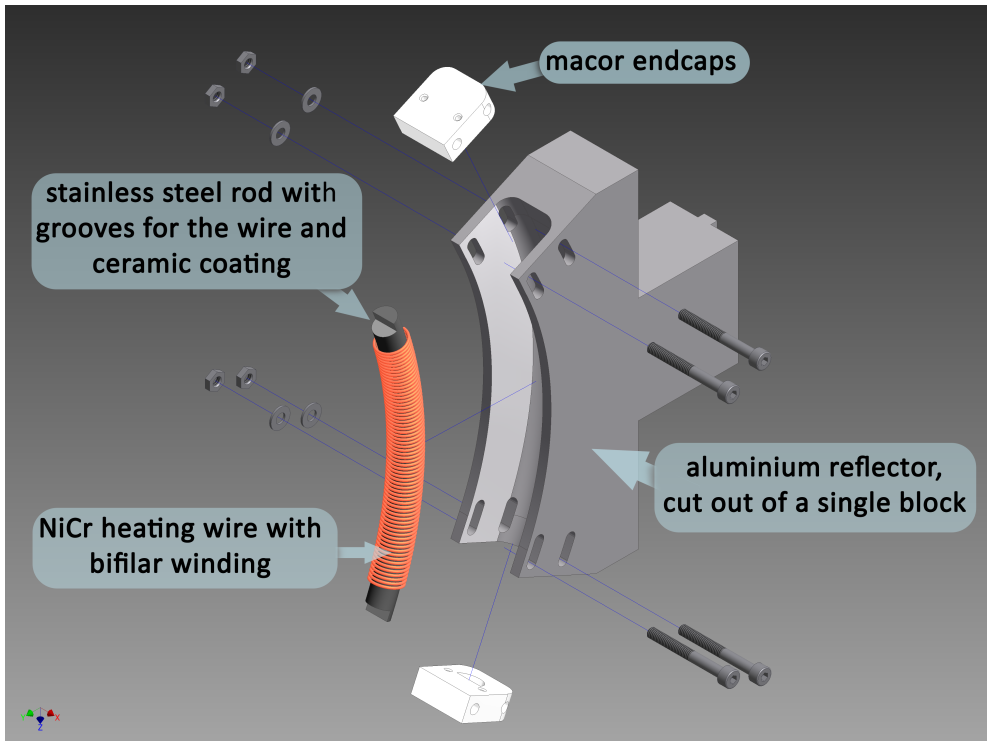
CAD drawing of one of the side heaters [WLA⁺14].
